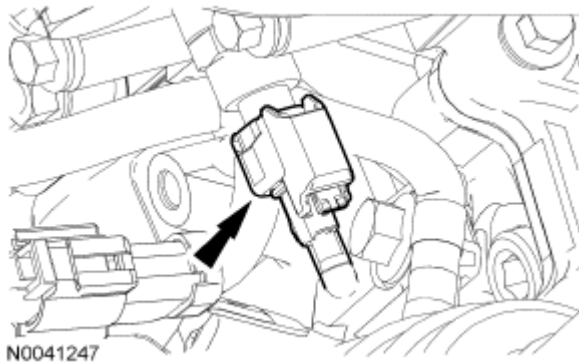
Locating Power Steering Pressure (PSP) Switch Electrical Connector
